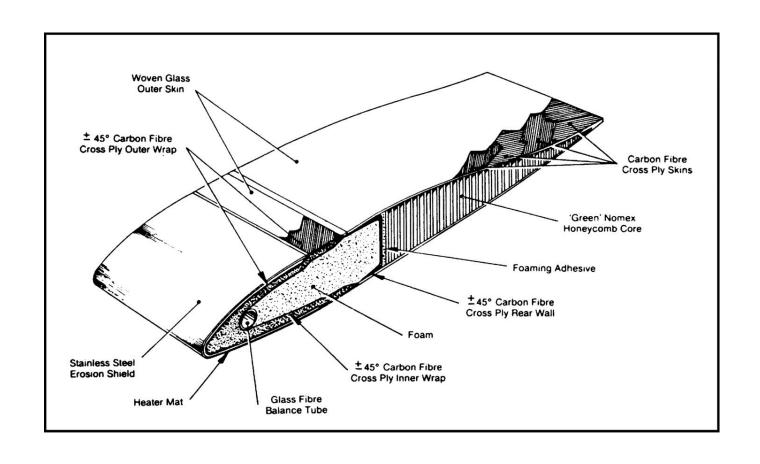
Sectional View of Helicopter Main Rotor Blade
